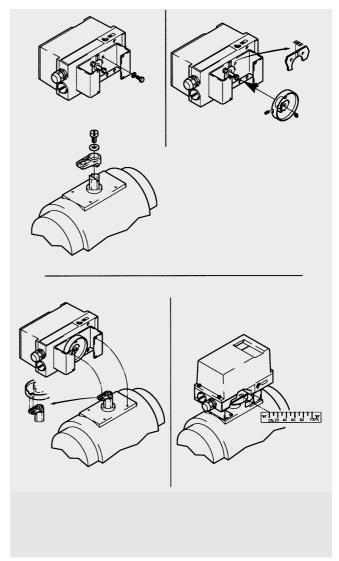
/17 Mounting of SIPART PS2 (PA) on part-turn actuators
